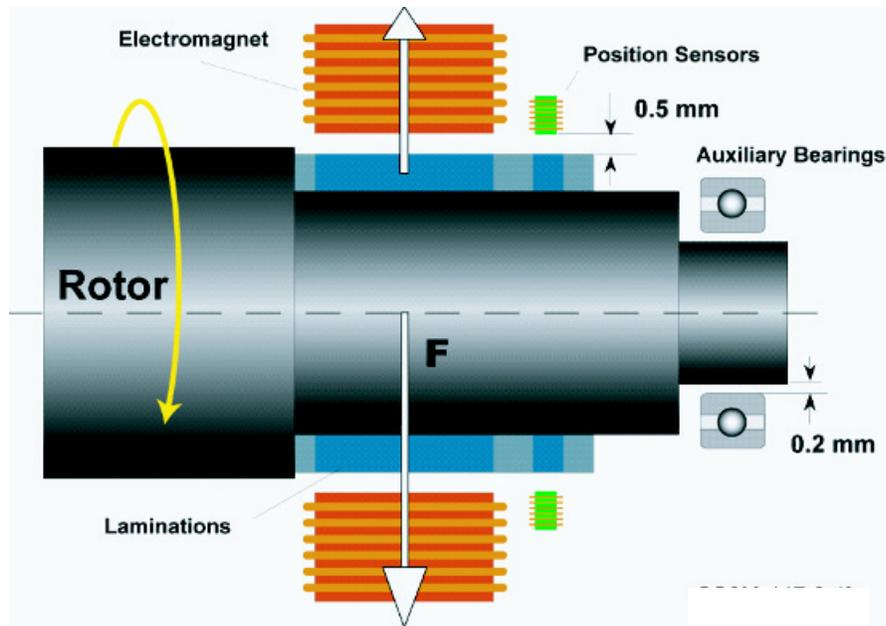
Radial magnetic bearing and auxiliary bearing.
